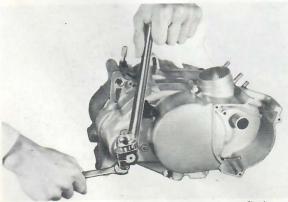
Loosening kick starter lever fitting bolt and removing kick starter lever
